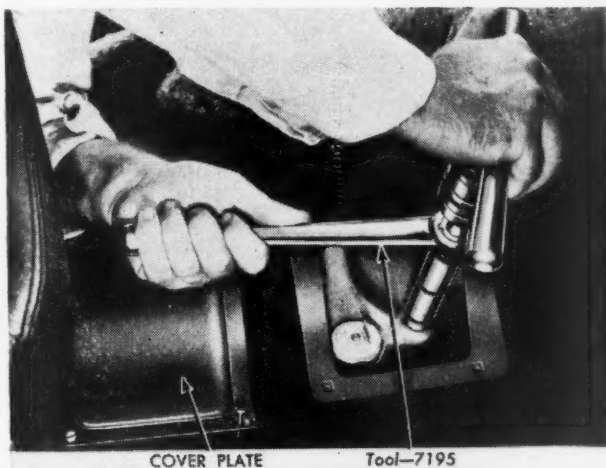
Special tool in position for tightening the rear band adjusting screw. Done from inside the car.
